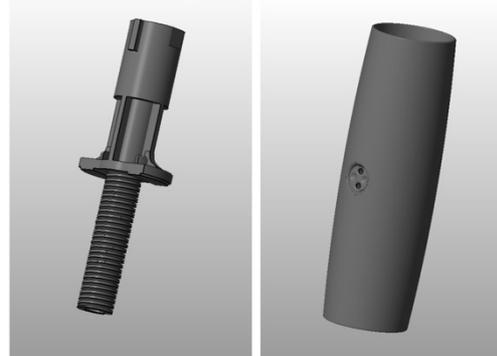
Graphic models of the screw-tool and the moulding master-piece
